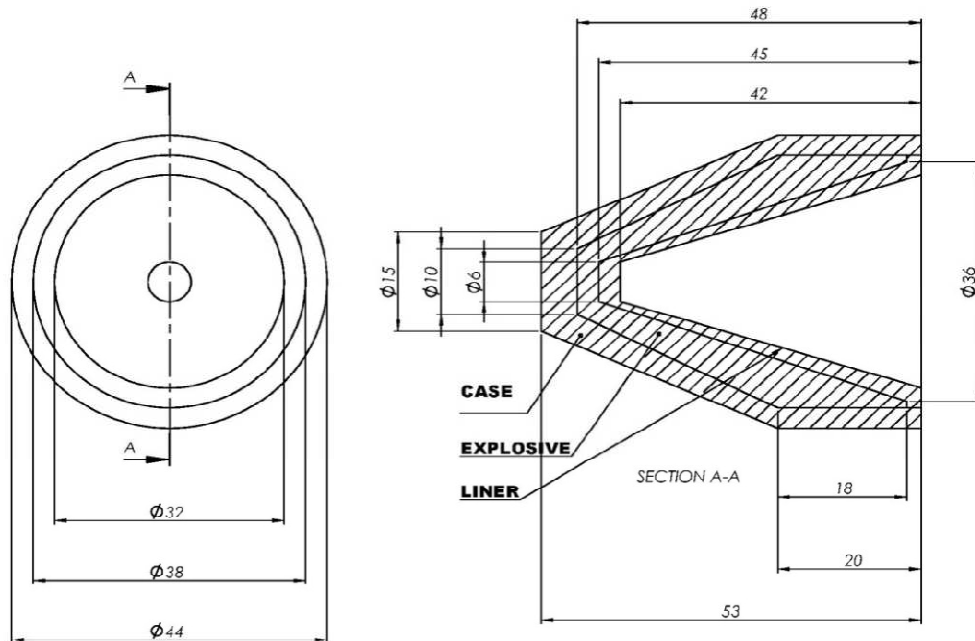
Technical draft of the shaped charge considered for the analysis of the considered perforating gun. Dimensions in millimeters.
